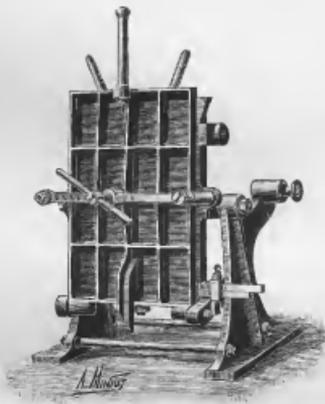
Casting-press for flat stereotype-plates: closed, and turned to the vertical or casting position.
